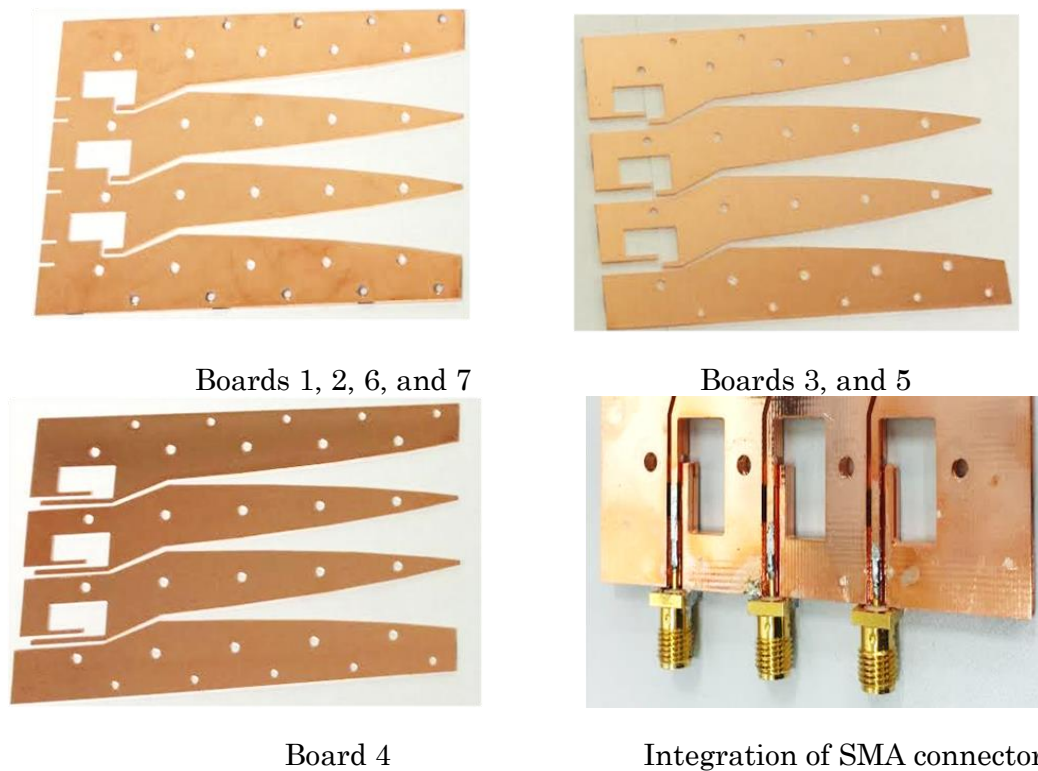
Illustration of the assembly for the array row: Boards 1, 2, 6, and 7 form the bottom and top layers. Boards 3 and 5 are used to form the sidewall of the rectangular coaxial line. Board 4 is the center layer and is used to solder the inner conductor of the coaxial feed line.
